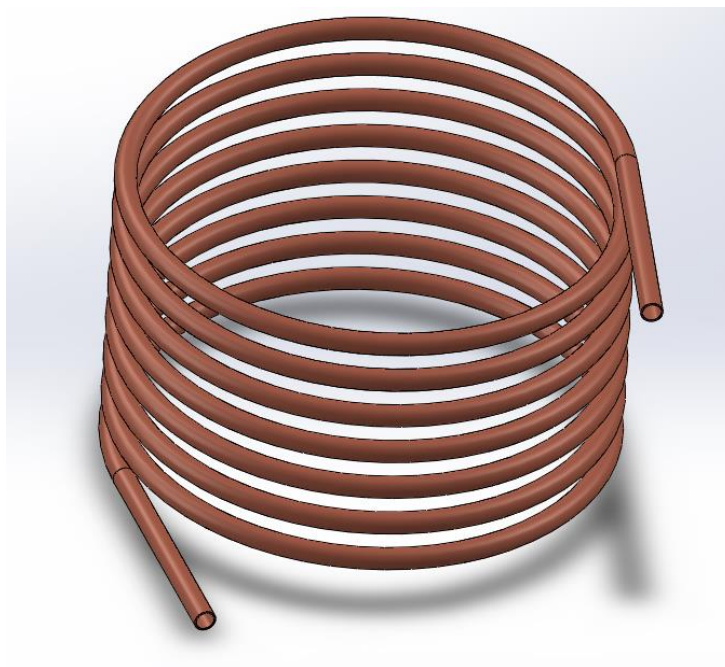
Spiral copper pipes with the extruded part for inlet and outlets
